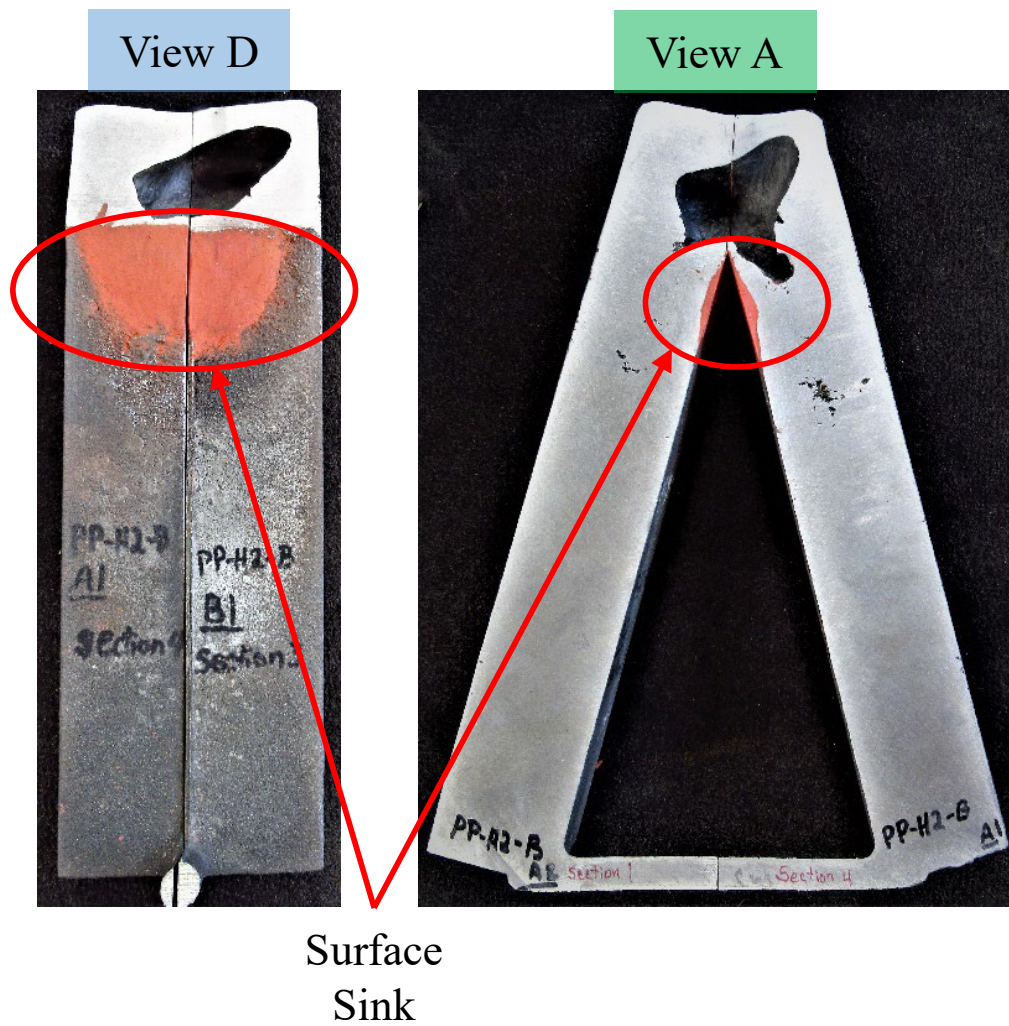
Porosity observed on cross sections A and D of the inverted V-shaped casting case B from the heat 2 porosity experiments.
